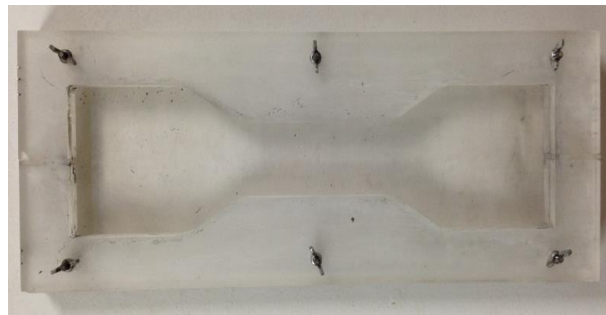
Moulds used to cast the specimens for direct tension testing.
